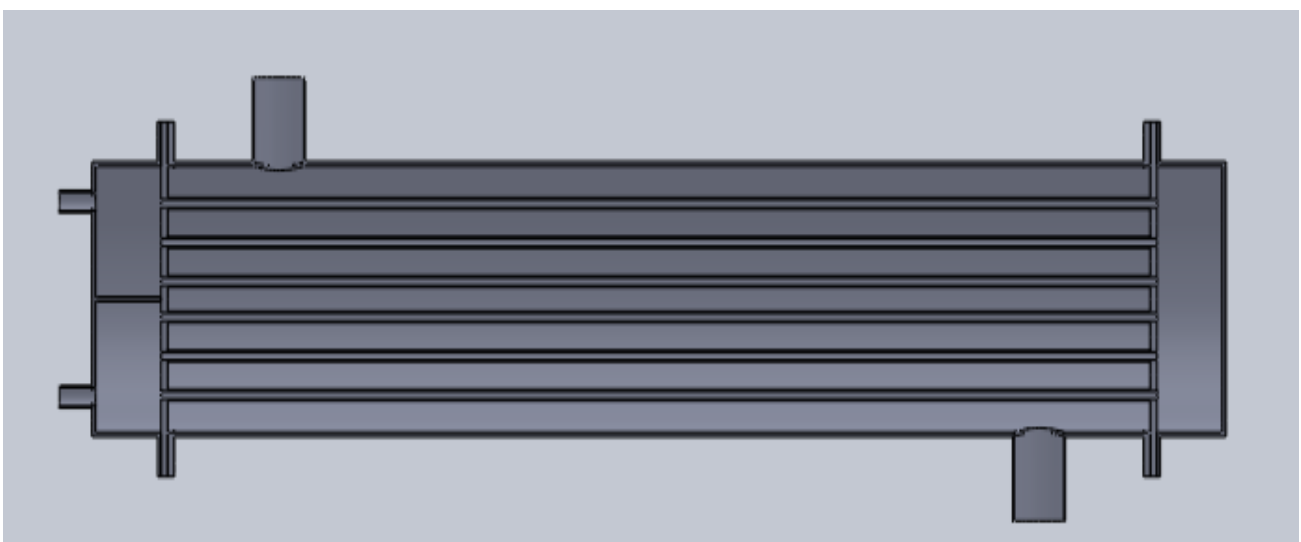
Sectional View Of Shell & Tube Type Heat Exchanger
